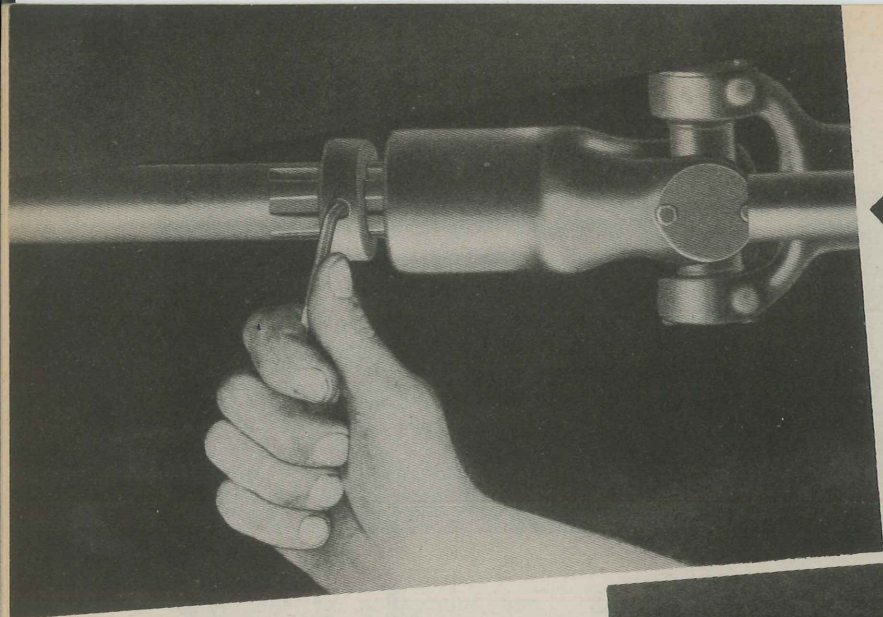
Loosen the allen screw on the propeller-shaft safety collar located on the rear end of the winch propeller shaft...
